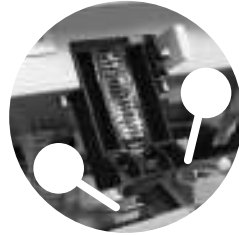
Remove the swing guide assembly (9 of 12)
